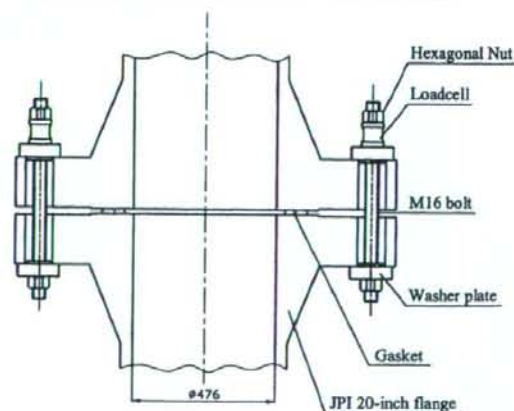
Flange joint with spiral wound gasket. (20-inch flange)
